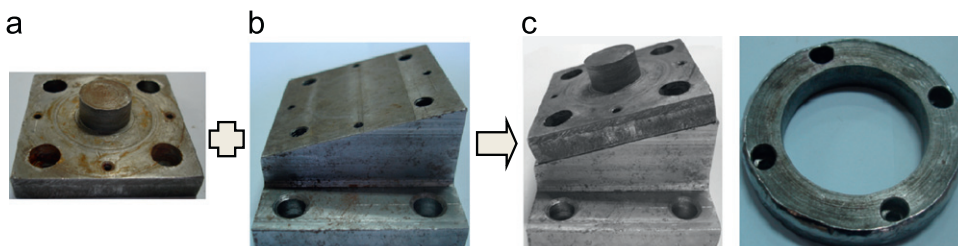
The parts to clamp specimens in oblique crushing experiments.
